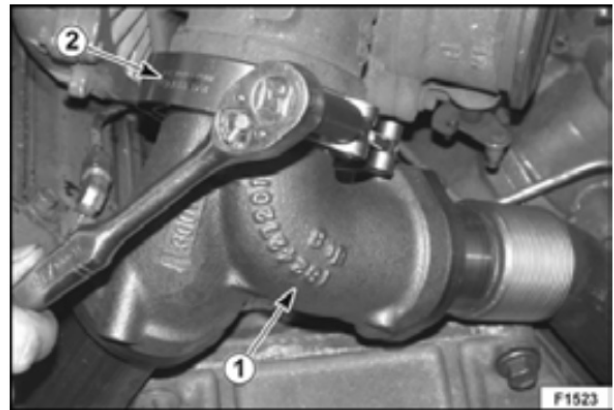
Installing the Exhaust Inlet Adapter to the Turbocharger (1998 and Up Model Years Shown)
